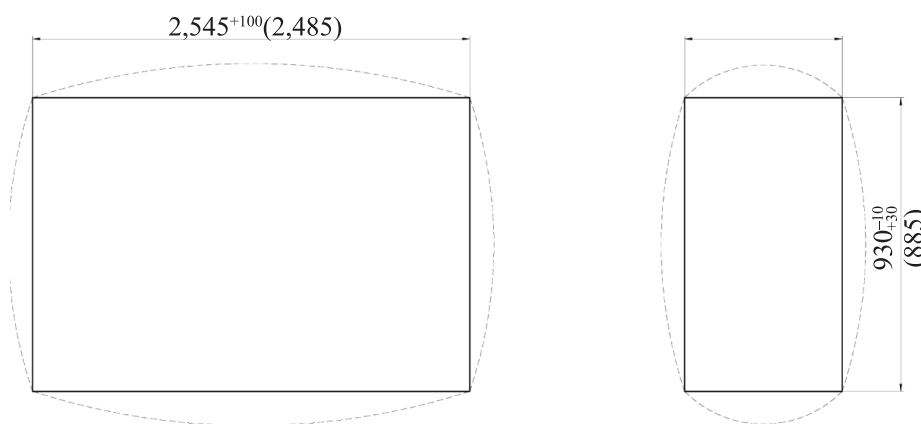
Sketch of a large-sized forging made of alloy 1933
